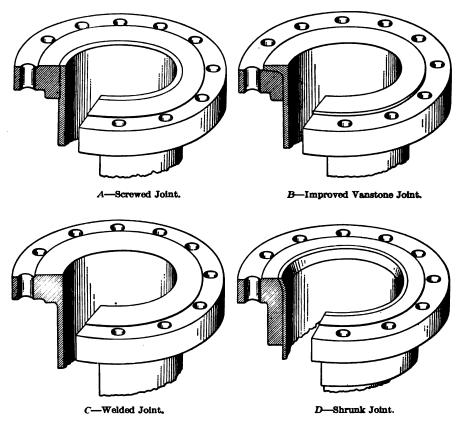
METHODS OF CONNECTING FLANGES TO WEOUGHT PIPE.
